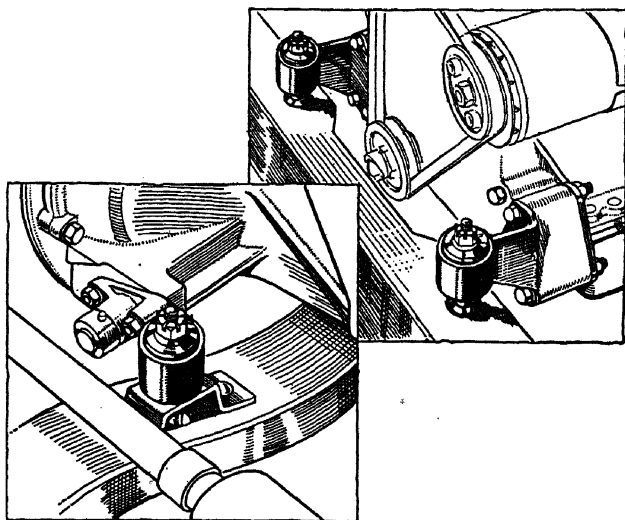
Flexible Rubber Supports between Engine and Chassis Frame. (Left) Rear End. (Right) Front End of Engine.
